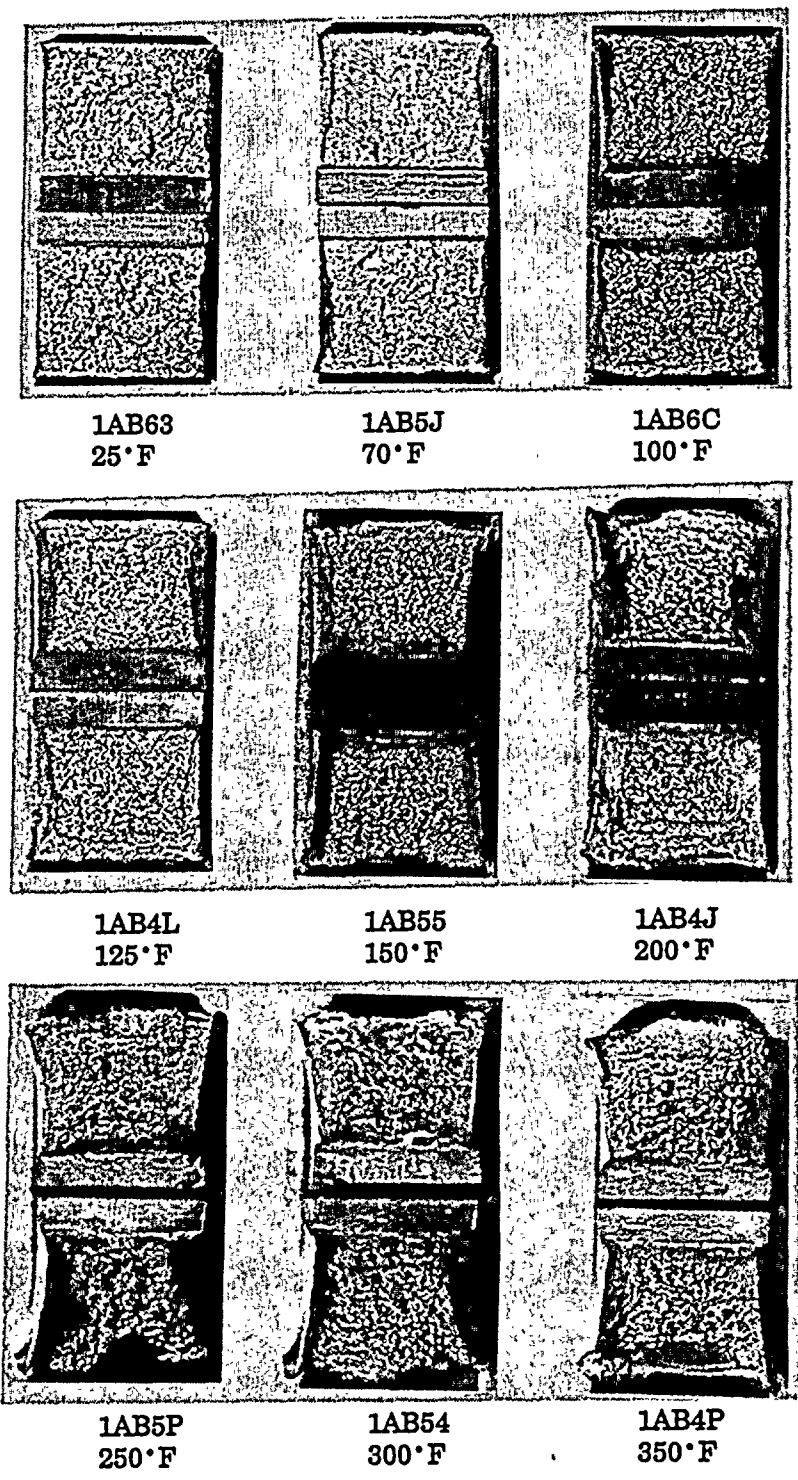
Charpy Impact Specimen Fracture Surfaces for Palo Verde Unit 1 SRM HSST 01MY (Longitudinal Orientation)
